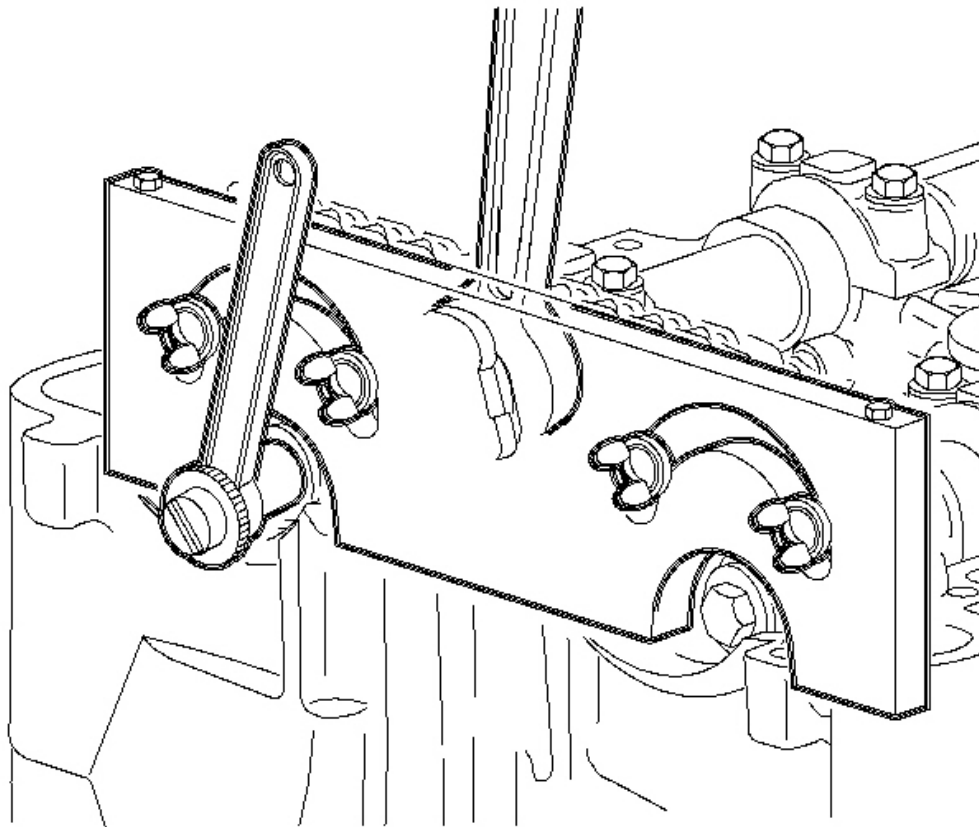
Holding Camshaft In Place Using A 24 mm Open End Wrench
